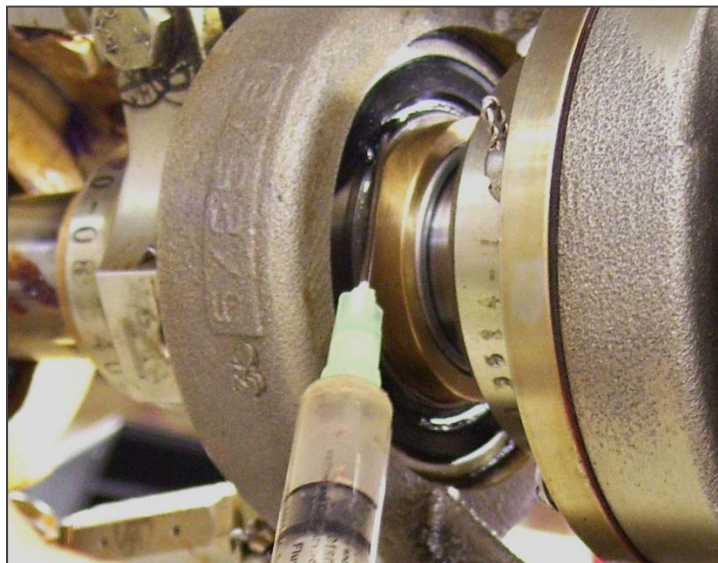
Tail Rotor Pitch Control Bearing Lubrication
